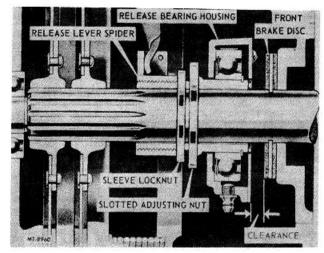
Release Bearing Adjustment (Lipe LP Clutch) (Manual Adjustment Type)
